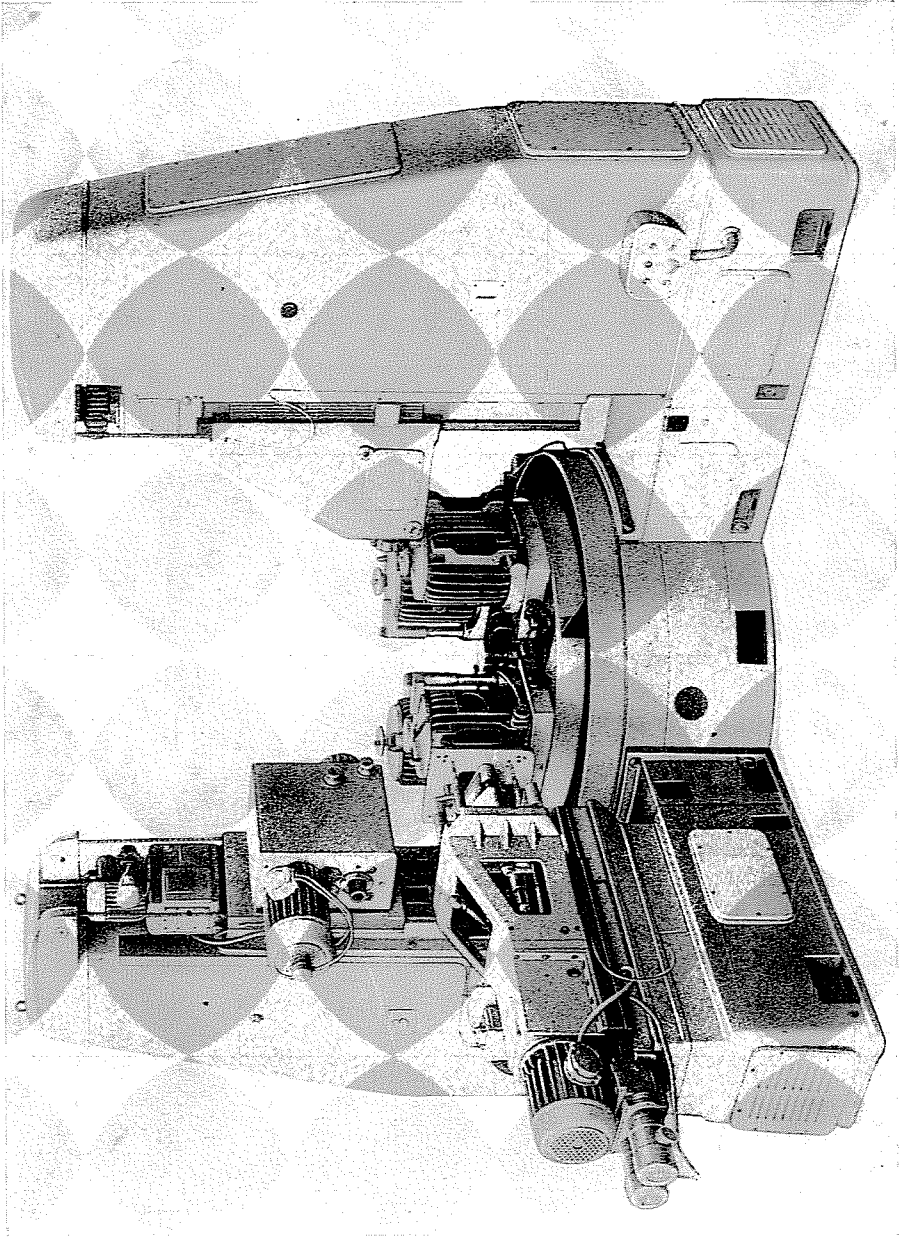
Type CD 4 Single-Purpose Machine with circular table
